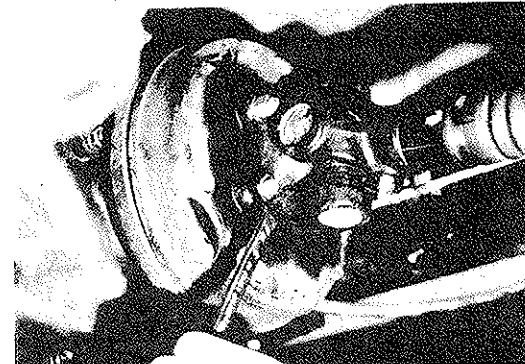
Rear Propeller Shaft Removal (Parking Brake Drum Side)
